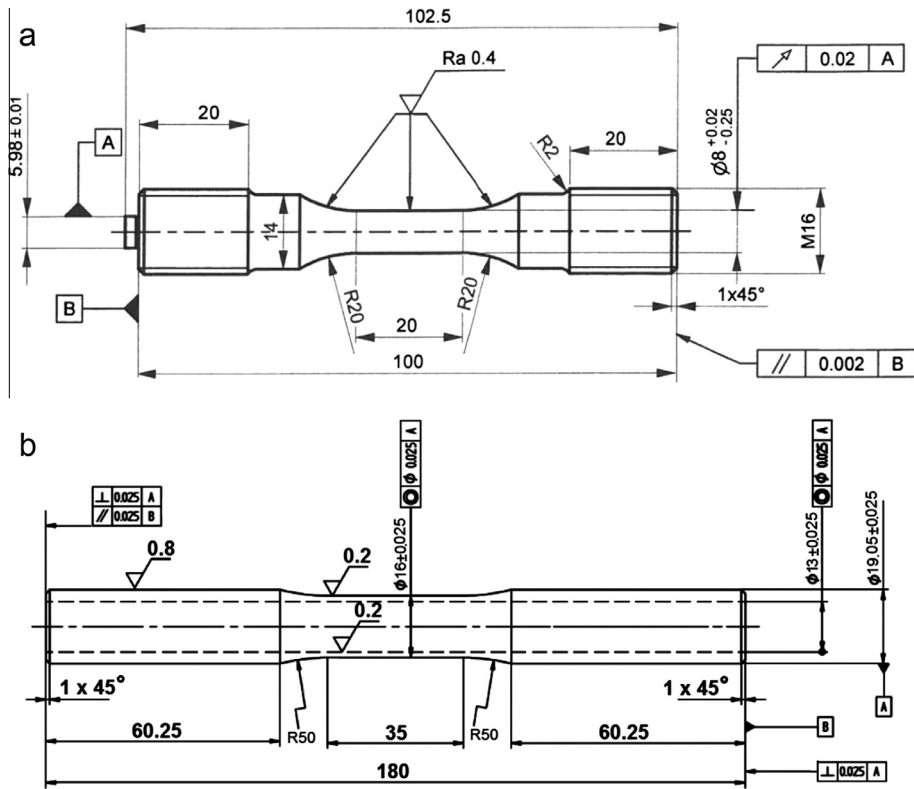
Geometry of specimens used for uniaxial (a) and torsional/multi-axial (b) fatigue experiments.
